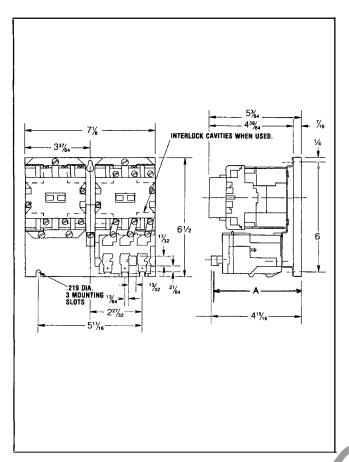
A210 Dimension Drawing (Dim. in inches)
